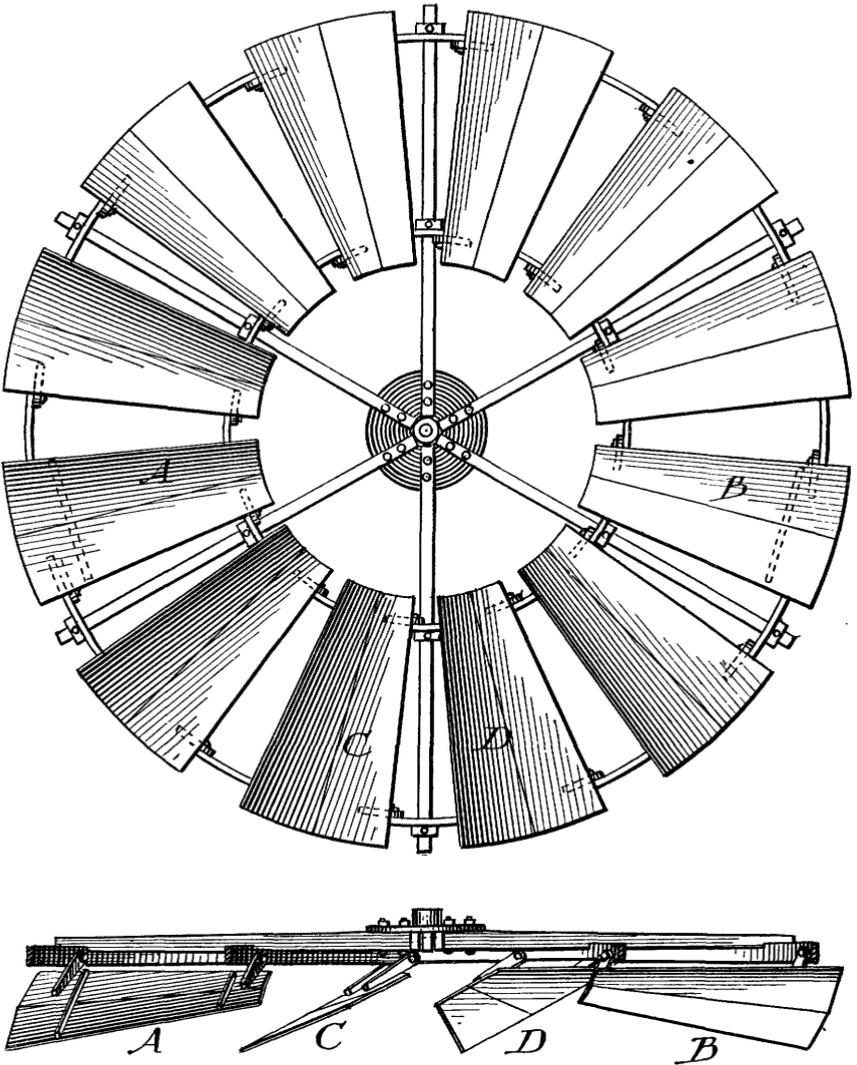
Elevation and section of wheel No. 35. (Sail area, 12,937 square feet; efficiency, 0.192.)
